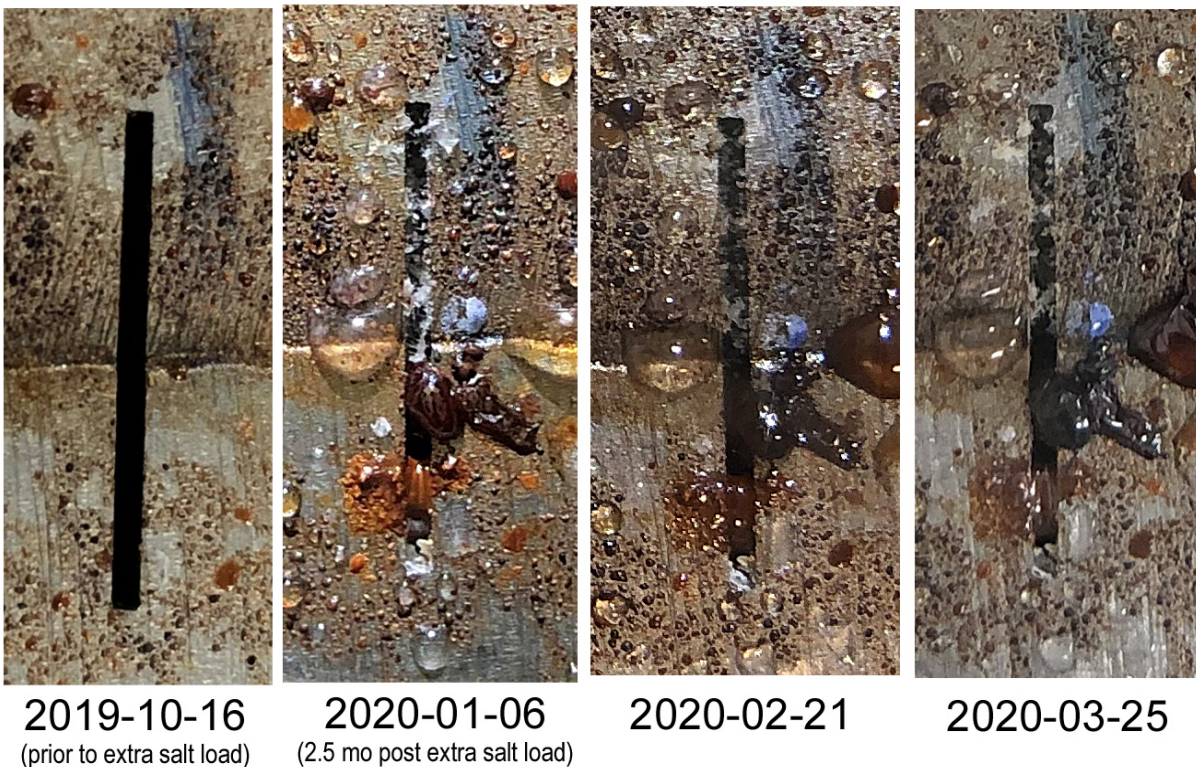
Closeup view of corrosion evolution of a semicircular surface crack VP2 after additional salt was applied (original crack length is 12 mm and is perpendicular to the weld)
